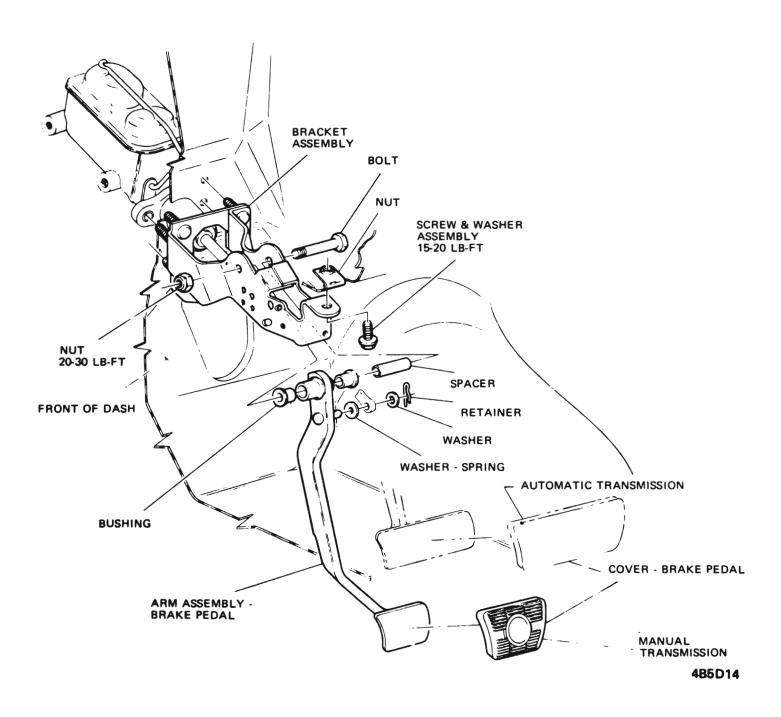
D-14 Brake Pedal Mounting - A Car Manual Brake
